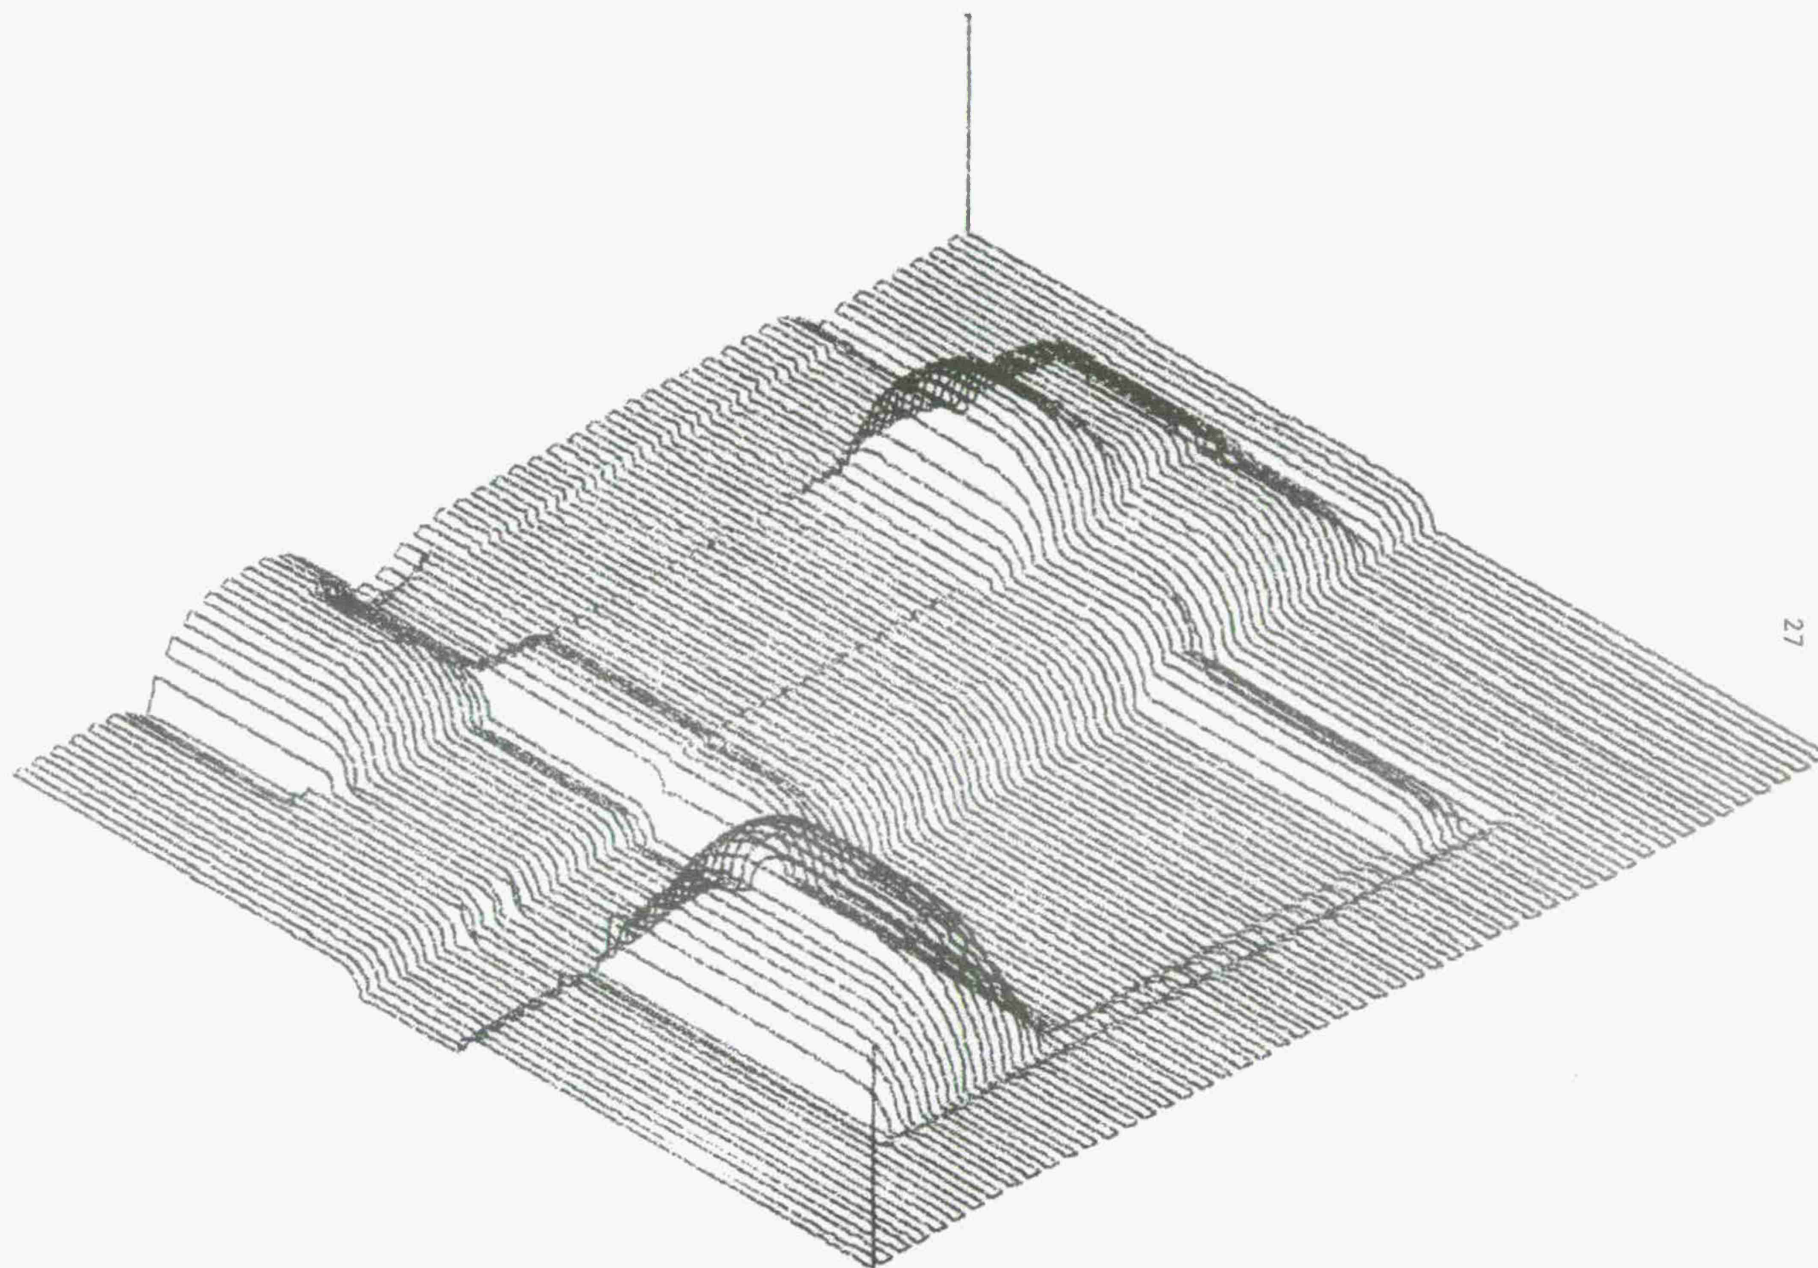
T-130 TRACK SHOE PREFORM CUTTER PATHS FOR 0.5-INCH BALL MILL (Lower Surface)
